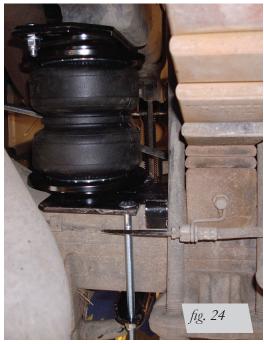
shows an inside rear view of the right (passenger) side assembly.
